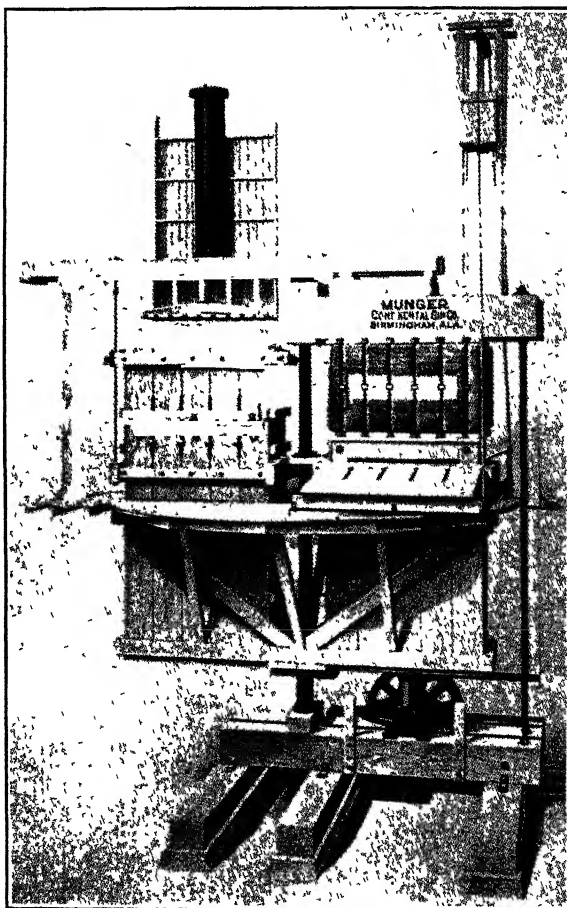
Revolving double-box press with 5-inch screw and plain steam-cylinder trampler. (*Courtesy Continental Gin Company.*)
